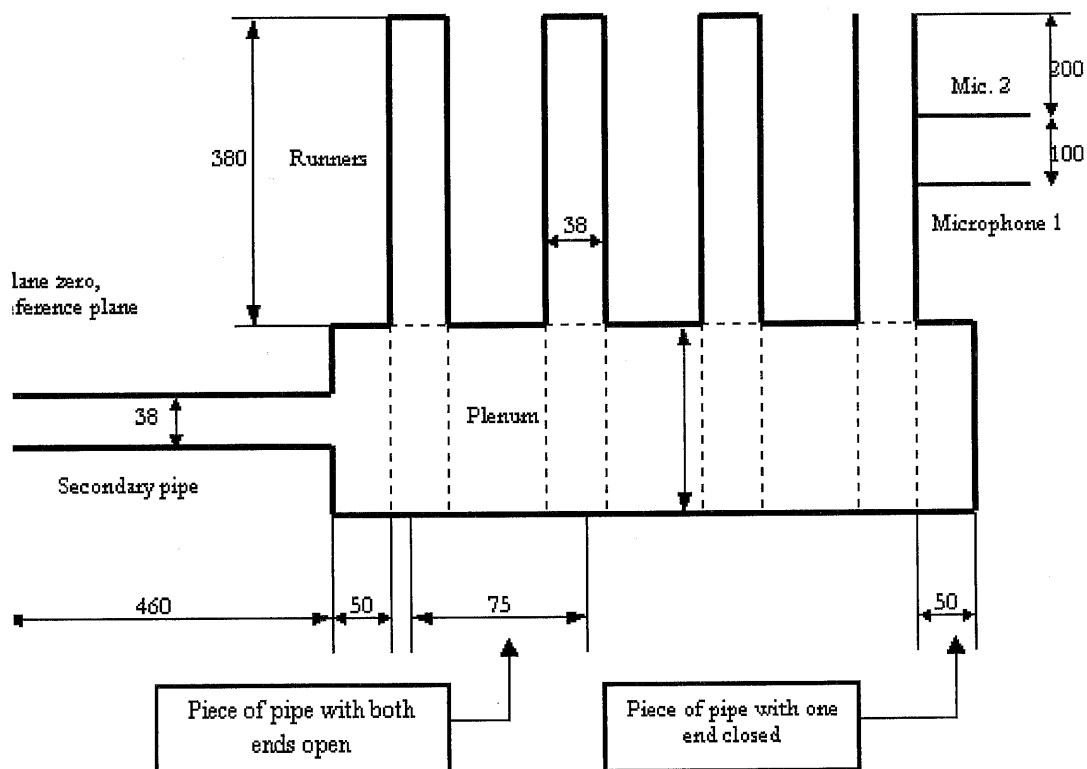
An end feed plenum type intake manifold. Dimensions are in millimetres.
